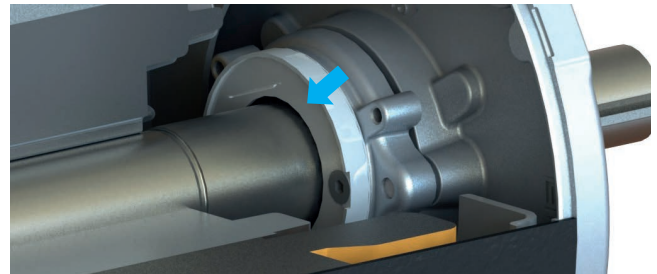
AEGIS® grounding brush installed on the bearing cap.
